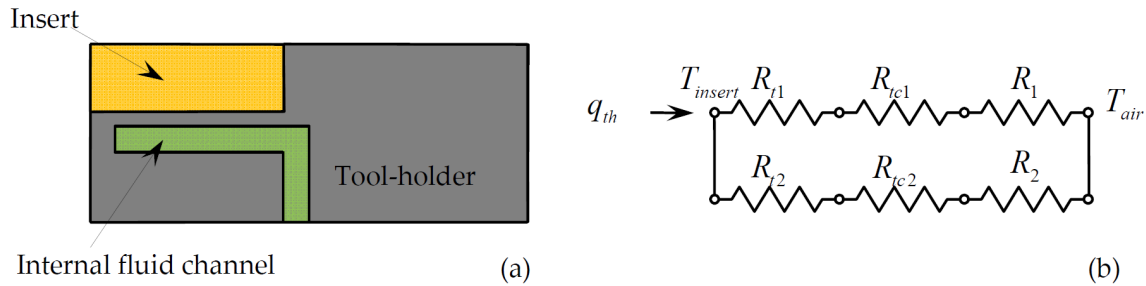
Insert and tool-holder (a) sketch; (b) thermal circuits.
